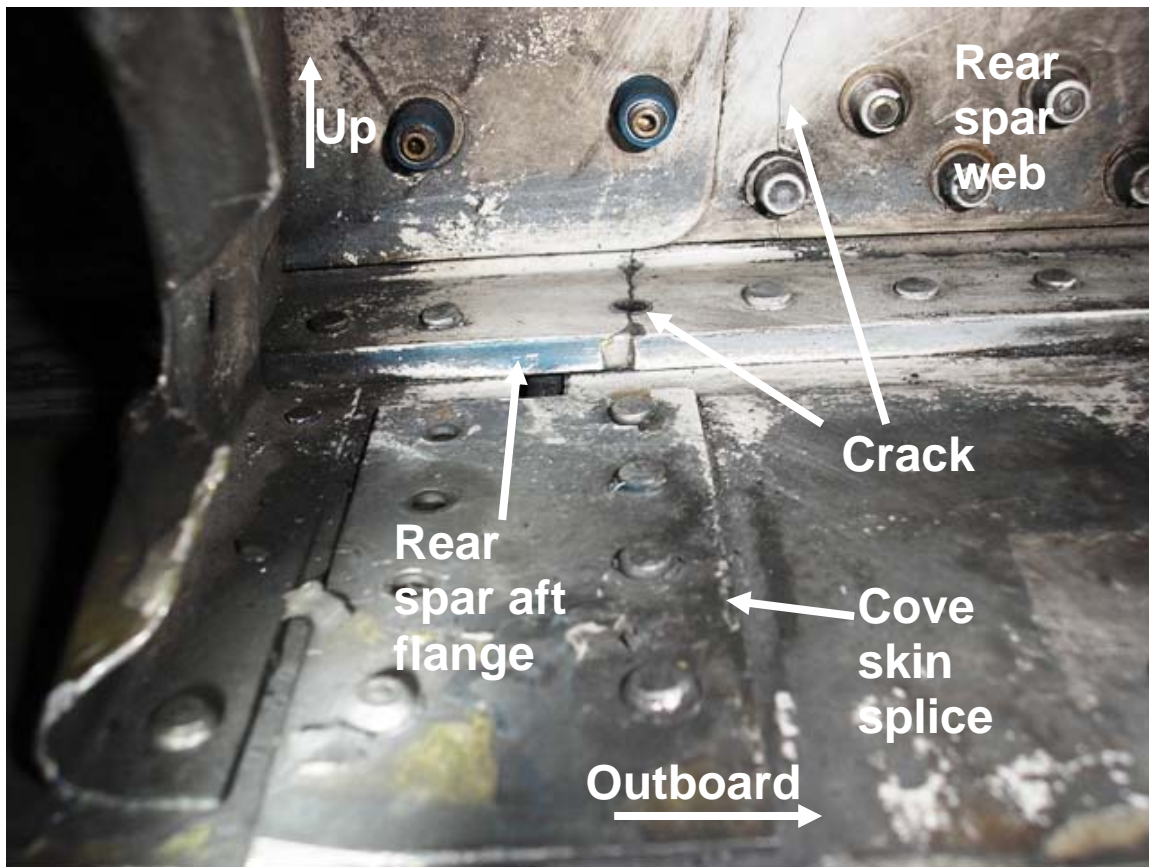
Closeup view of R/H wing rear spar cracks at BL 114 area looking forward (The inboard flap is removed in this figure, but removal of the flap is not required to do the inspection).
